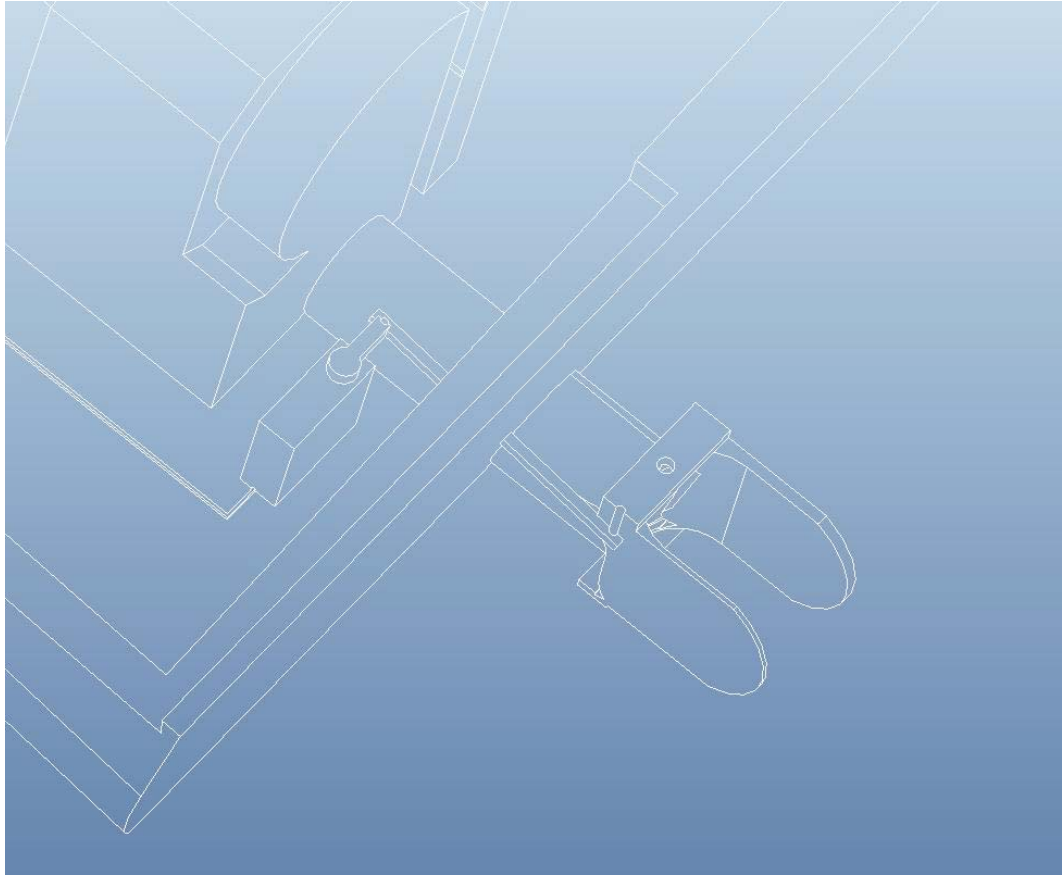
Steering System: shown above the servo motor,linkage arm and swiveling steering nozzle mounted to the outlet tube.
